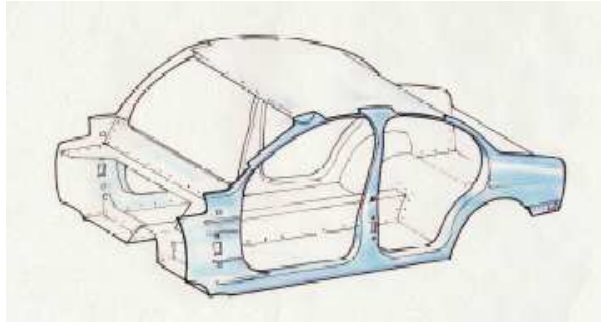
The welded Steel Monocoque Chassis. (pg39 (Reimpell 2001))
